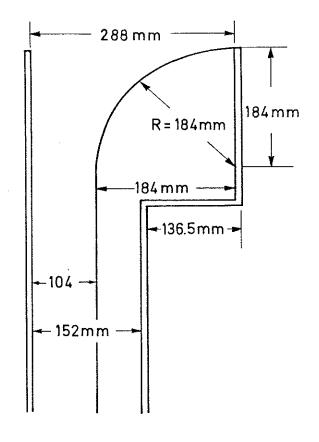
COMPRESSOR INLET SECTION MODIFICATION FOR DESIGNS J AND K.
